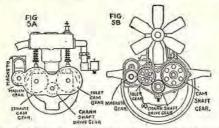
A. Magneto driven by gears on a "T"-head engine. Fig. 5B. Magneto driven by gears on an "L"-head engine.
